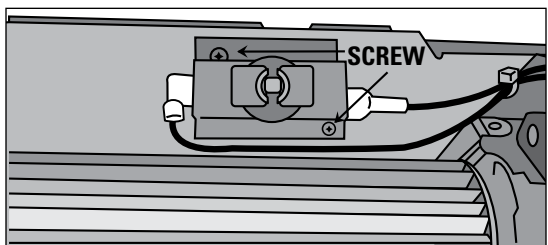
Models manufactured 8/09 and later have one limit and screws.
